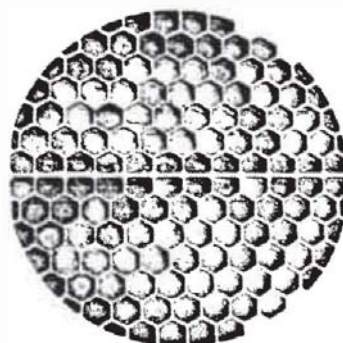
Circular blank made of two brazed pieces (rear face represented), diameter 630 mm. This blank was developed for demonstrating brazing technique.
